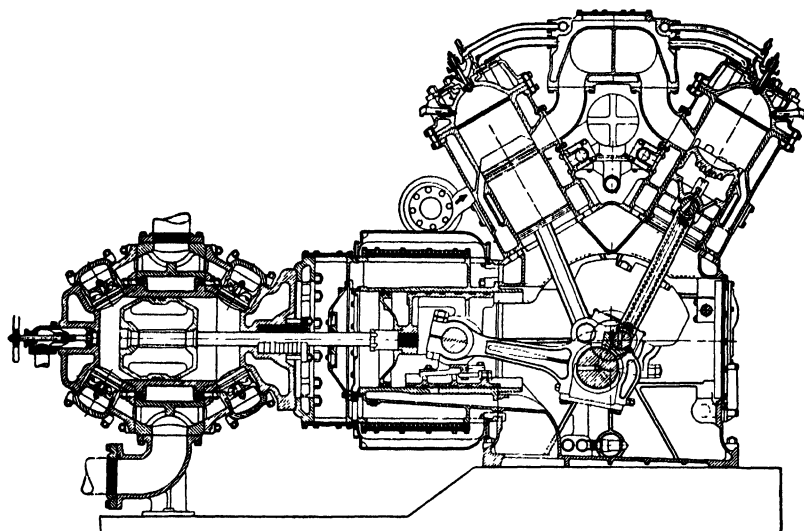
Typical gas engine compressor. (Courtesy of The Cooper-Bessemer Corp.)
